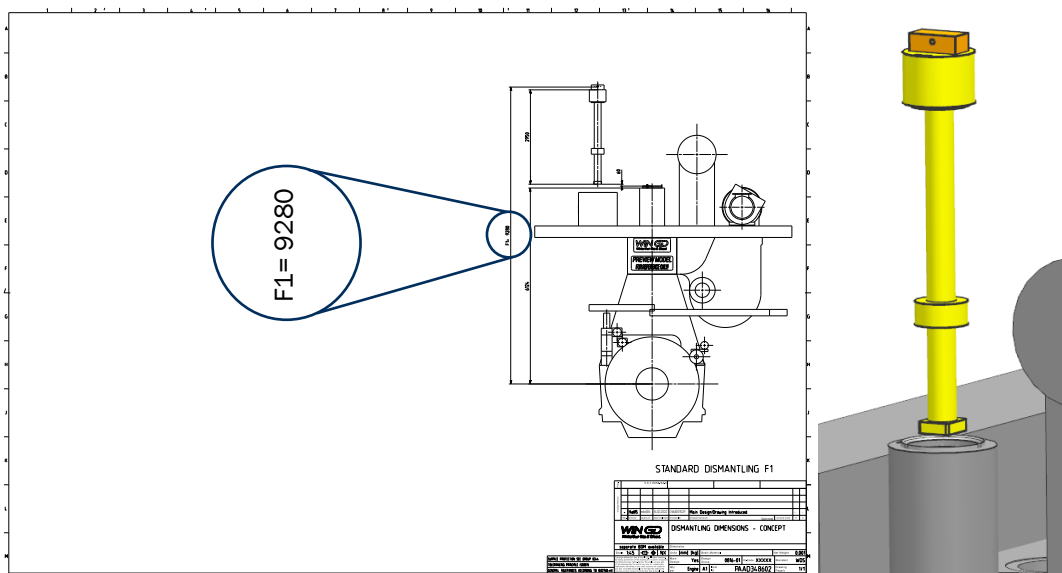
Example drawing of new Dismantling Dimensions – Concept (DG 0816-01) for X52-S2.0 engines. The 3D CAD model of the drawing (shown in yellow and orange) provides the space requirement of the working piston.
